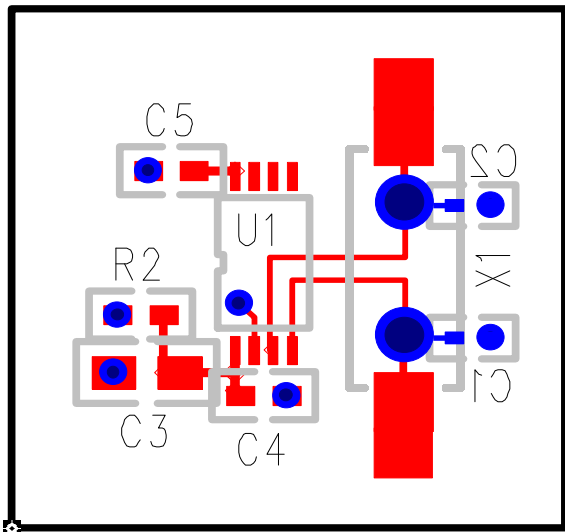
B. ICS843011C PC BOARD LAYOUT EXAMPLE
